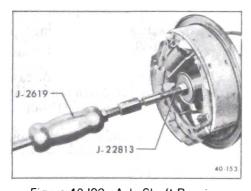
Axle Shaft Bearing and Seal Remover Installed
